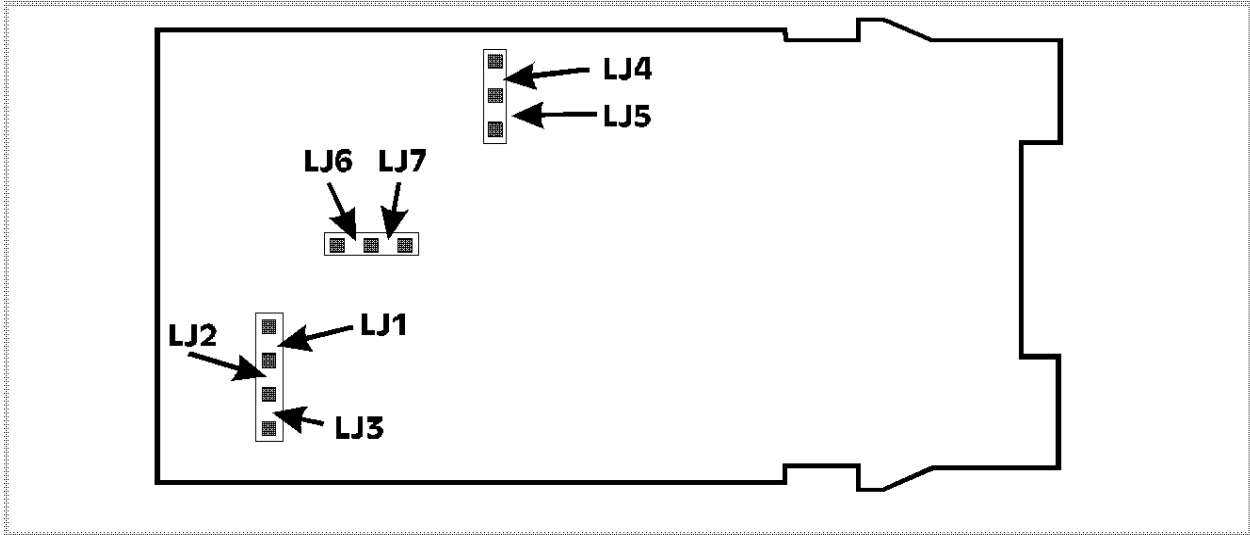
CPU PCB (Relay/SSR Drive/Solid State Output 1)
